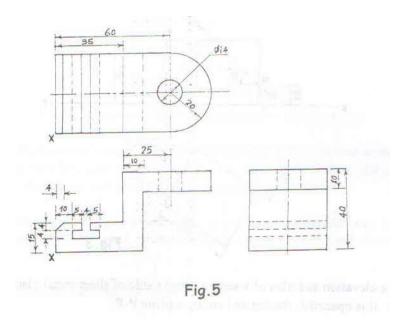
shows the orthographic view of a casting in third angle projection. Draw full size, the isometric view of the casting making X the lowest point.
